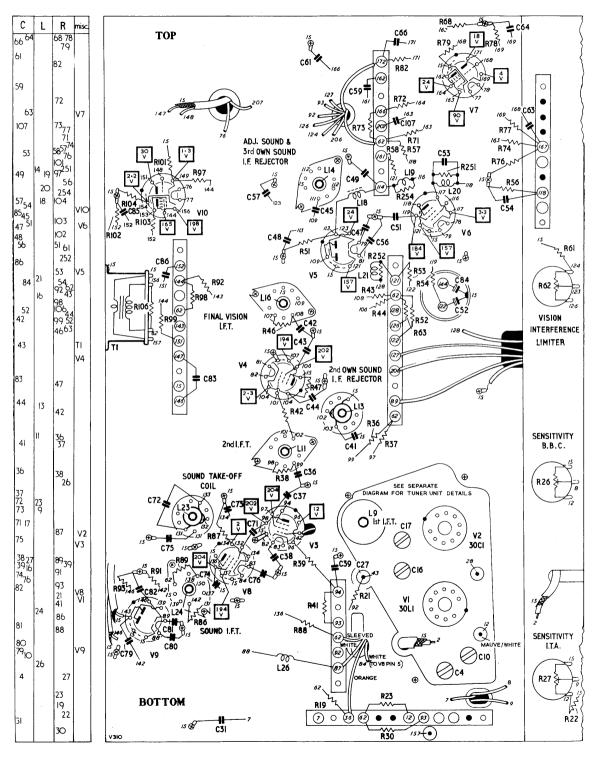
The outer side of the receiver chassis. See page 15 for details of the tuner chassis.
